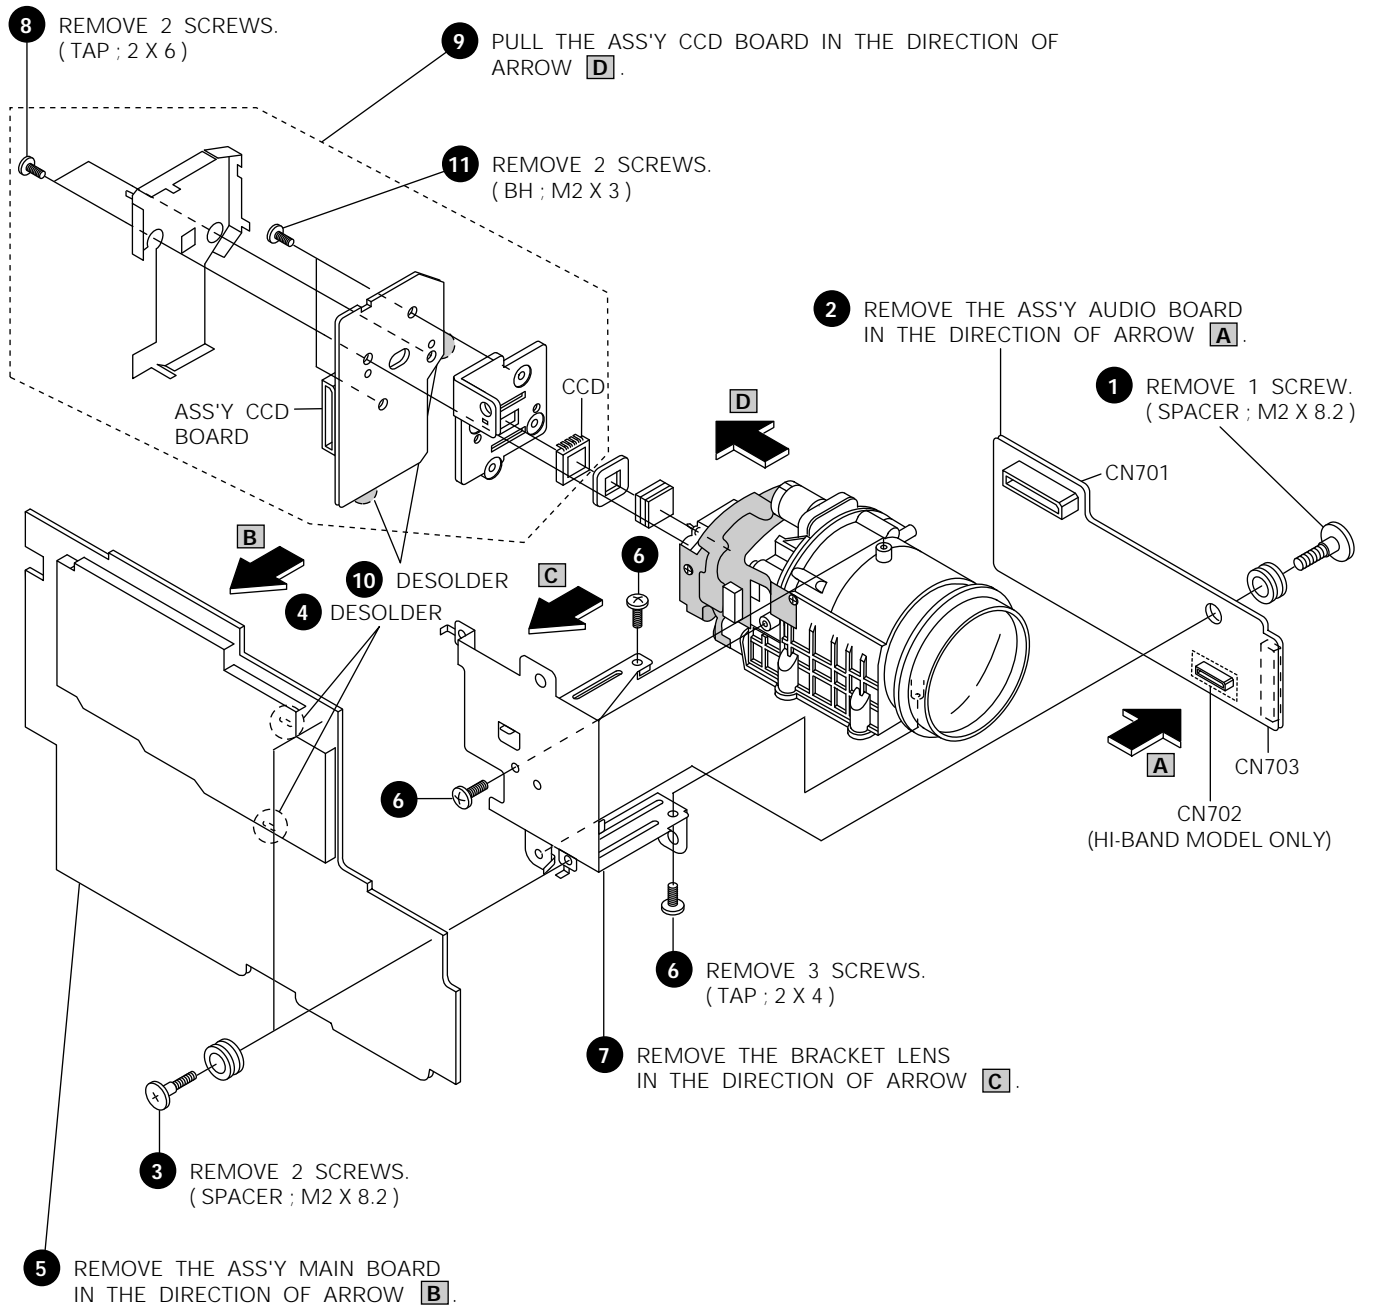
Ass'y Main Board and Ass'y Camera Removal
